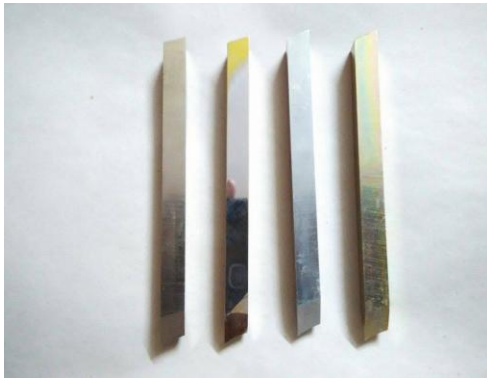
Single point HSS cutting tool (left to right: uncoated, Nickel coated, Zinc coated and Cadmium dipped tool)
